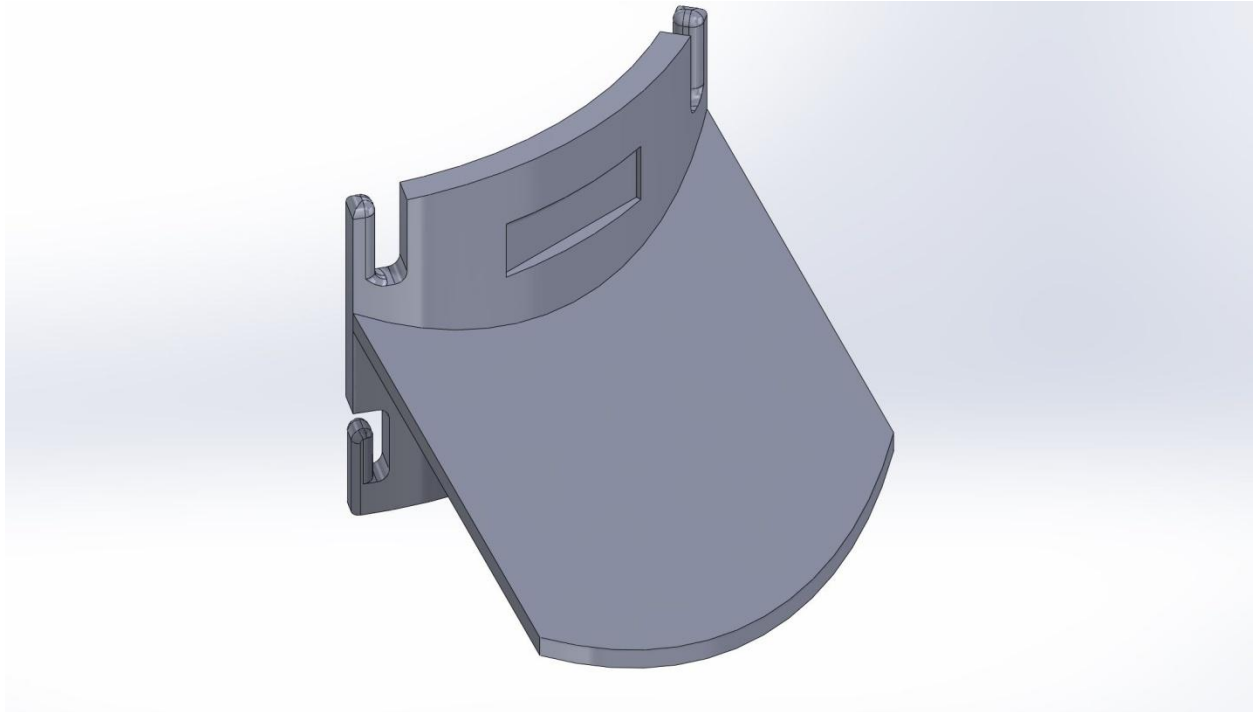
The back half of an airbrake. The main part fits directly into the front part of the airbrake. This makes assembling the airbrakes in the rocket extremely simple.
